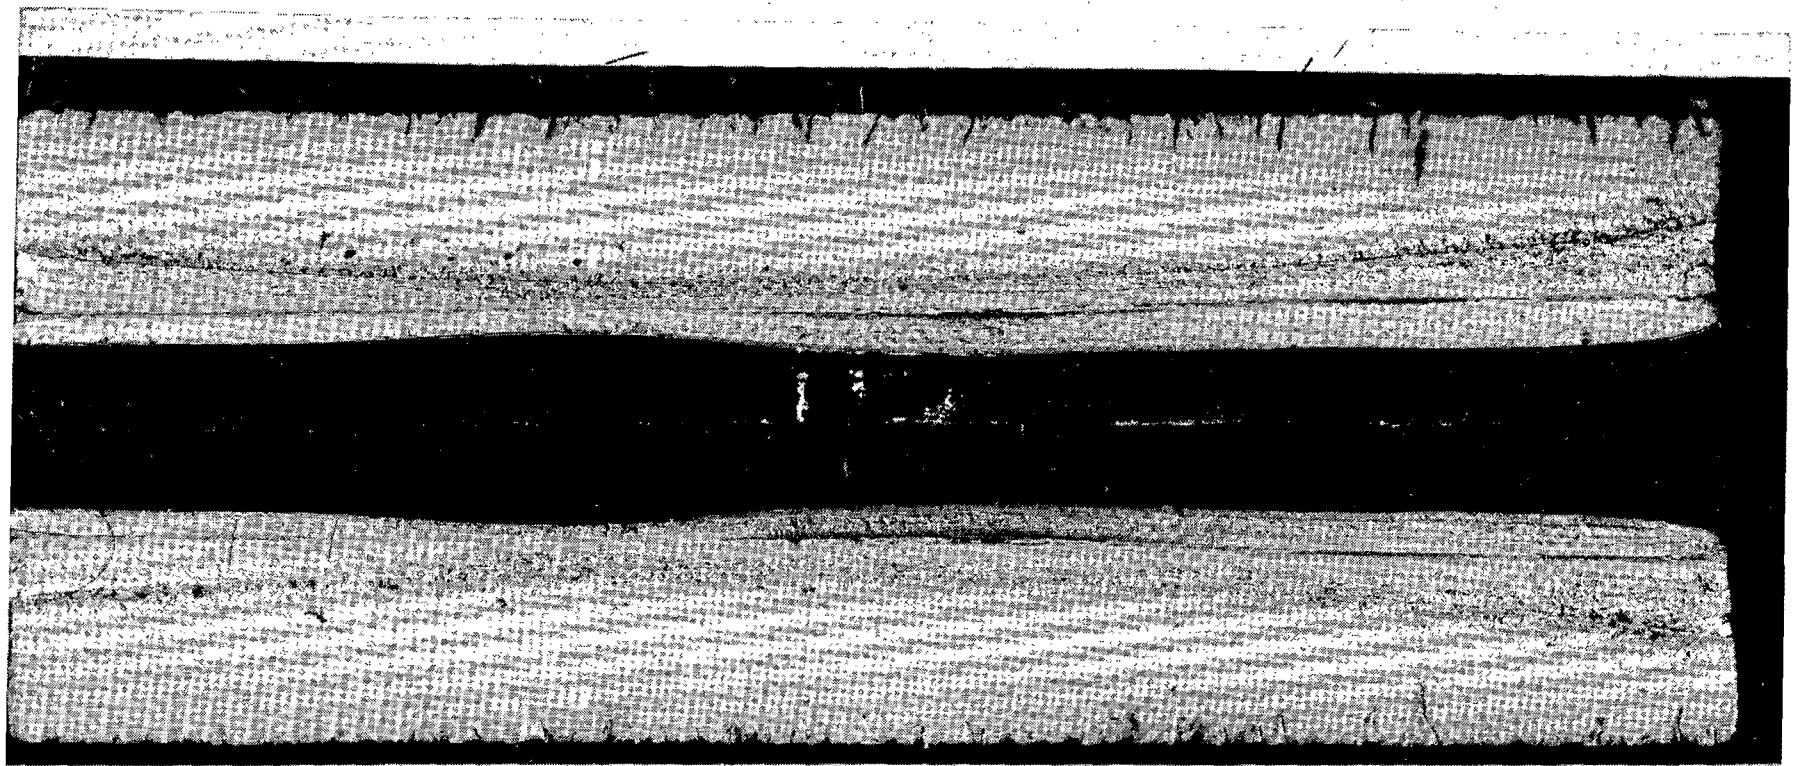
Fracture surface 40 mm specimen (scale 1:1).
